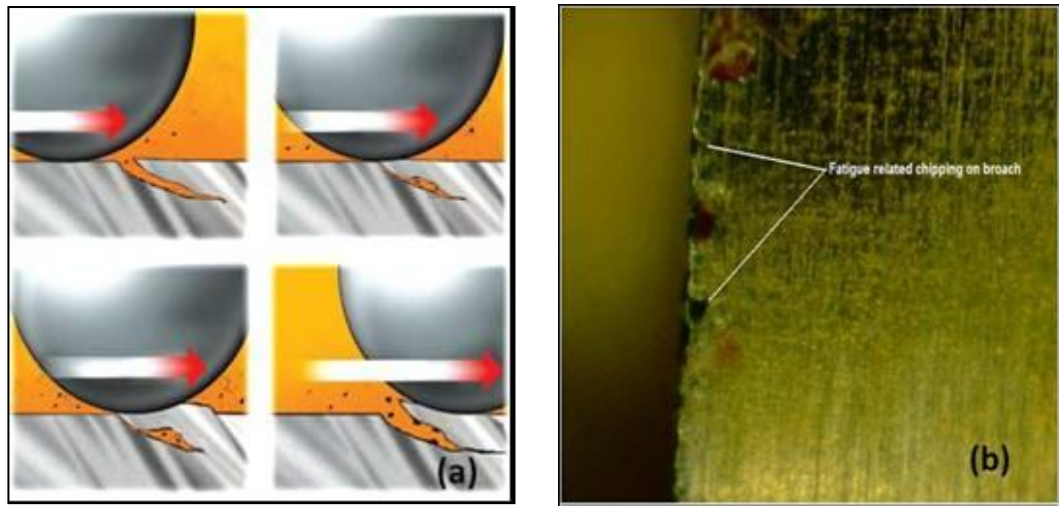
, (a) Surface fatigue mechanism [44], (b) Fatigue of a metal surface [45].
